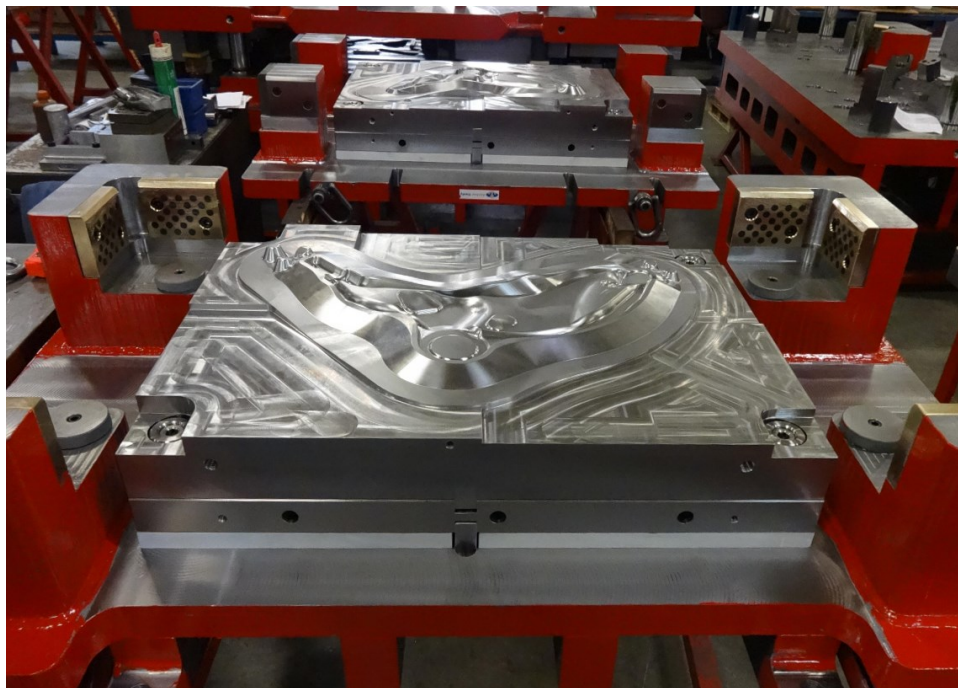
Upper and lower tools being assembled at Multimatic Technical Centre
